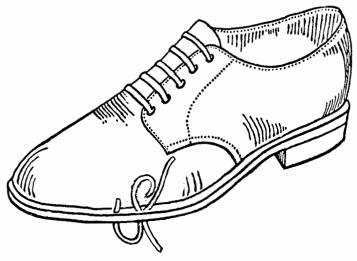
Thread on sole side passed through hole at the same time thread is passed through upper side.
